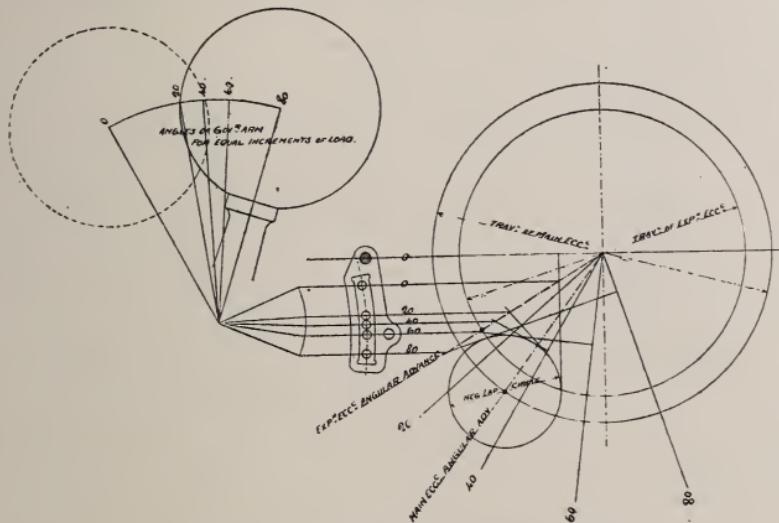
Hartnell Gear. Two Slide Valves.
